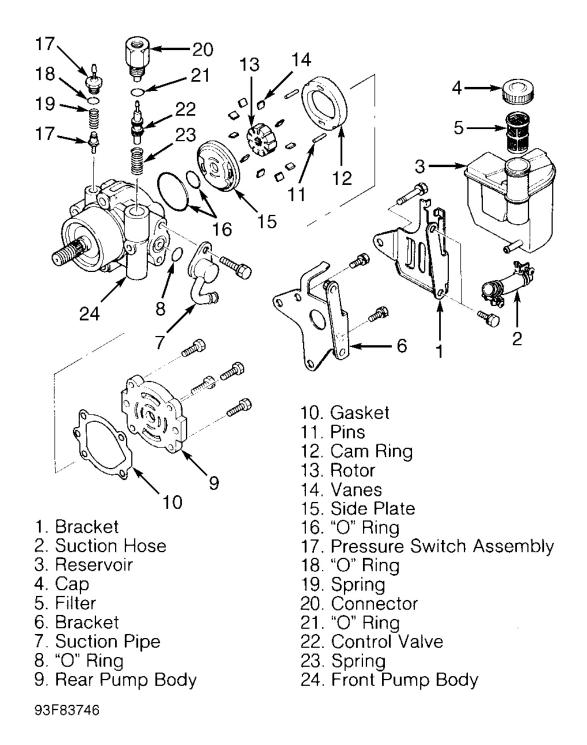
Exploded View Of Power Steering Pump (RX7)
